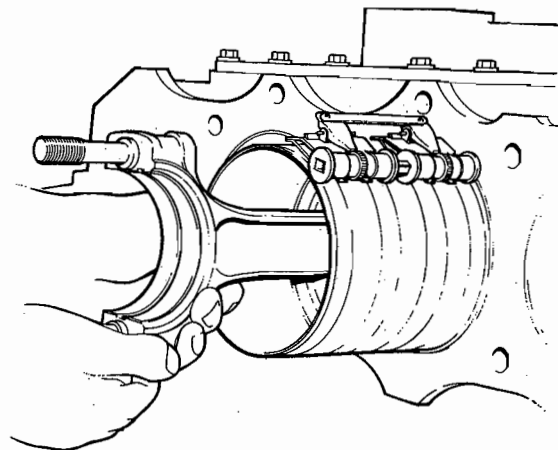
FITTING PISTON AND CONNECTING ROD INTO CYLINDER BORES
